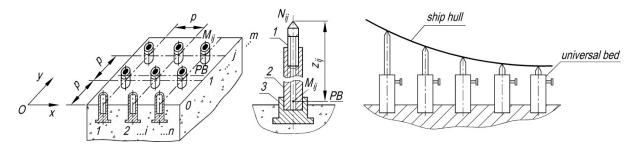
Universal assembly device with point support: *1* – support screw cone; *2* – standard tubular section; *3* – tubular fixing body
